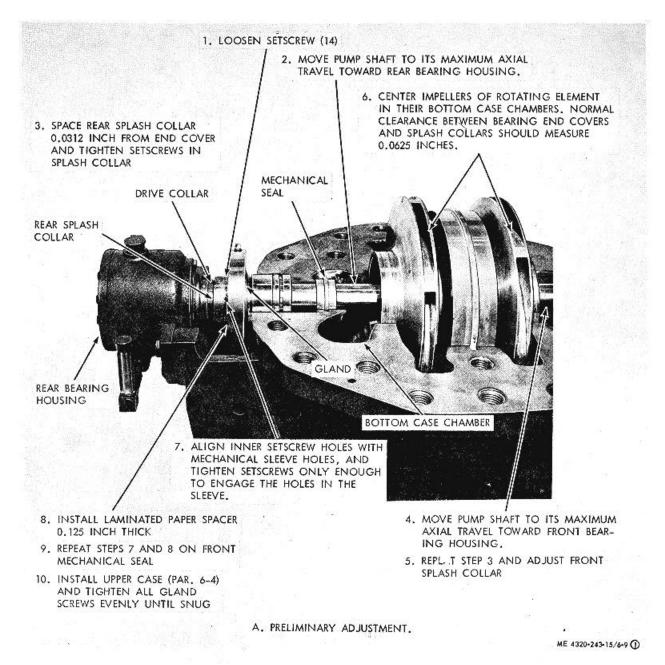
Splash collar and mechanical seal adjustment sequence.
